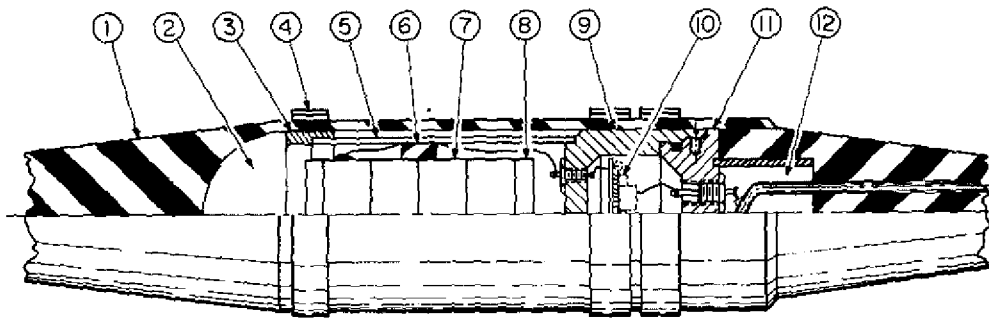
Sectional view of USRD type H78B hydrophone: (1) integral butyl boot and cone adapter, (2) castor-oil coupling fluid, (3) frame end ring, (4) banding, (5) expanded metal frame, (6) elastomer sensor mount, (7) ceramic sensor, (8) aluminum oxide end cap, (9) preamplifier housing, (10) preamplifier, (11) cable gland with butyl cone, and (12) potting compound
